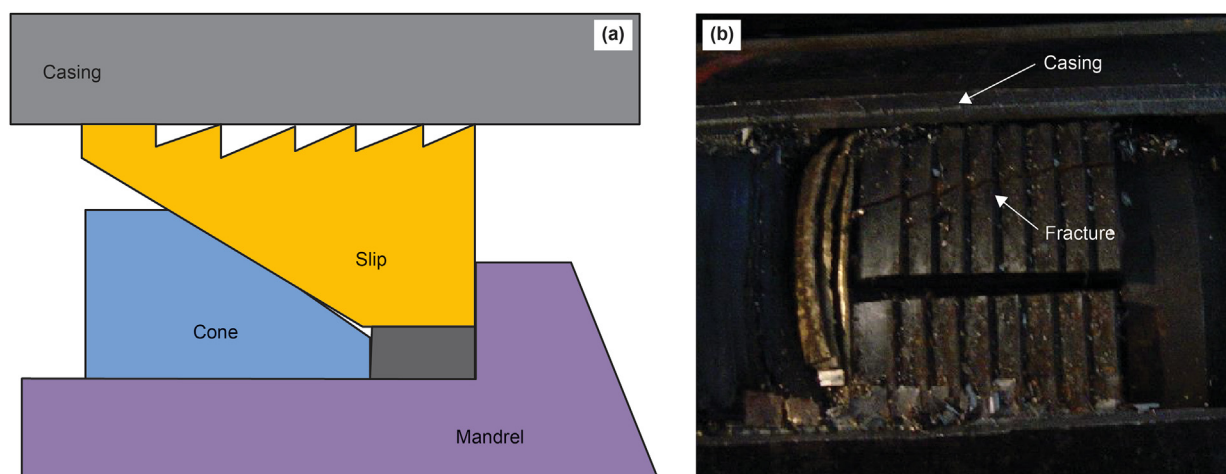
Slip assembly: (a) slip lodged into the casing, (b) fracture failure.
